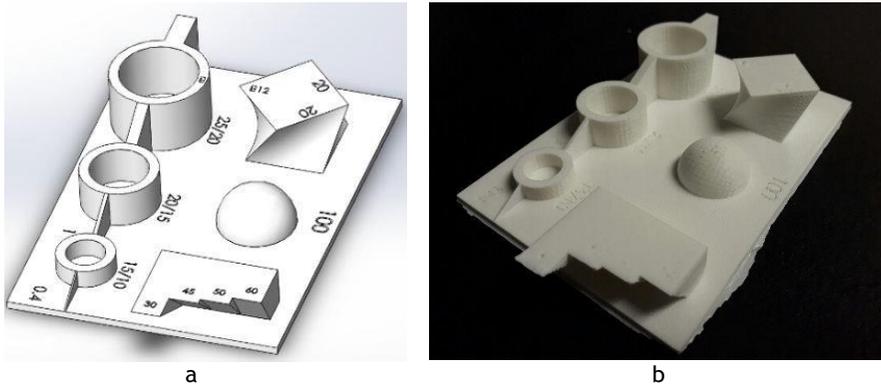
CAD design of dimensional accuracy test part (a) and FDM printed part (b).
